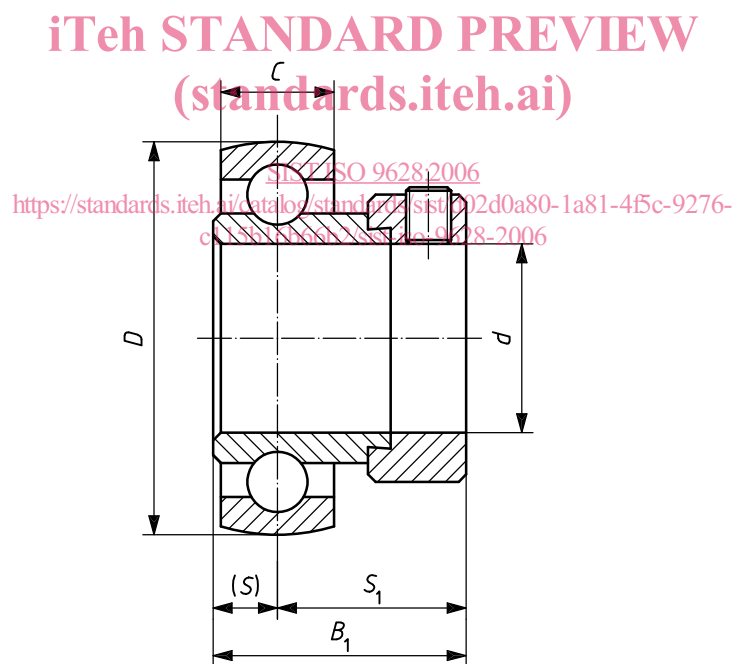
Bearing with eccentric locking collar — Narrow overall width
